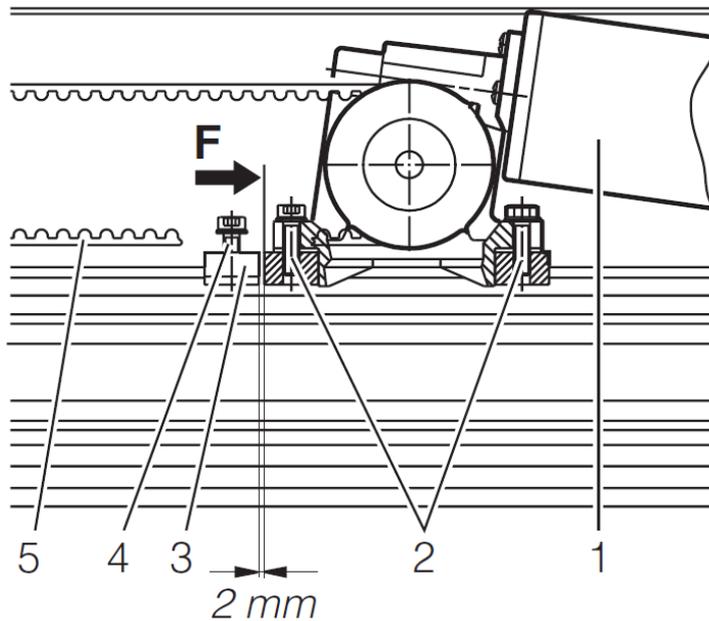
GEZE Slimdrive SL/SL-FR 2M (GmbH GEZE, 2003) The 2 mm gap is used to fit a screwdriver. With the leverage that screwdriver provides, the idler pulley is moved.
